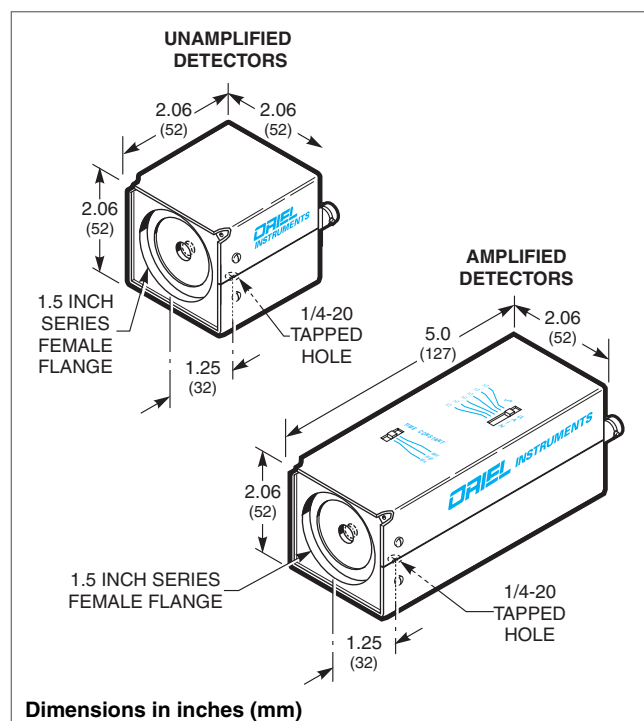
Dimensional drawing of some InGaAs and Ge Detectors.
